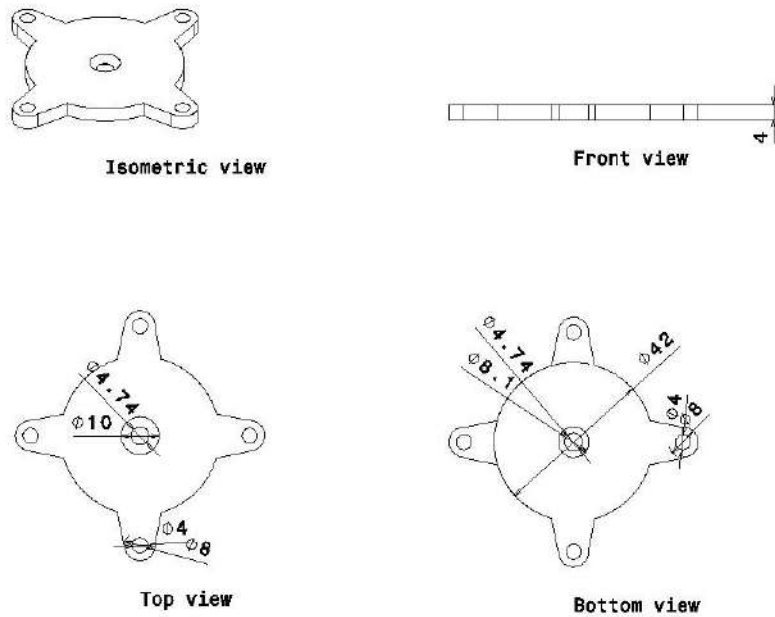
Pinhole holder part technical draw with isometric, front, top and bottom views (units in mm).
